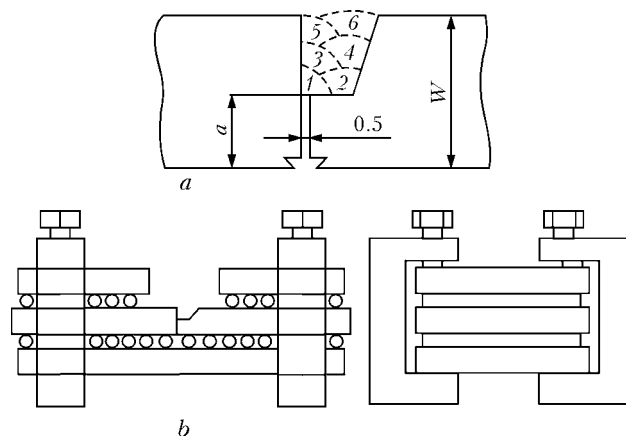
Schematics of welded specimen with IRFP in edge (*a*) and device for its welding (*b*): 1–6 — groove filling sequence
